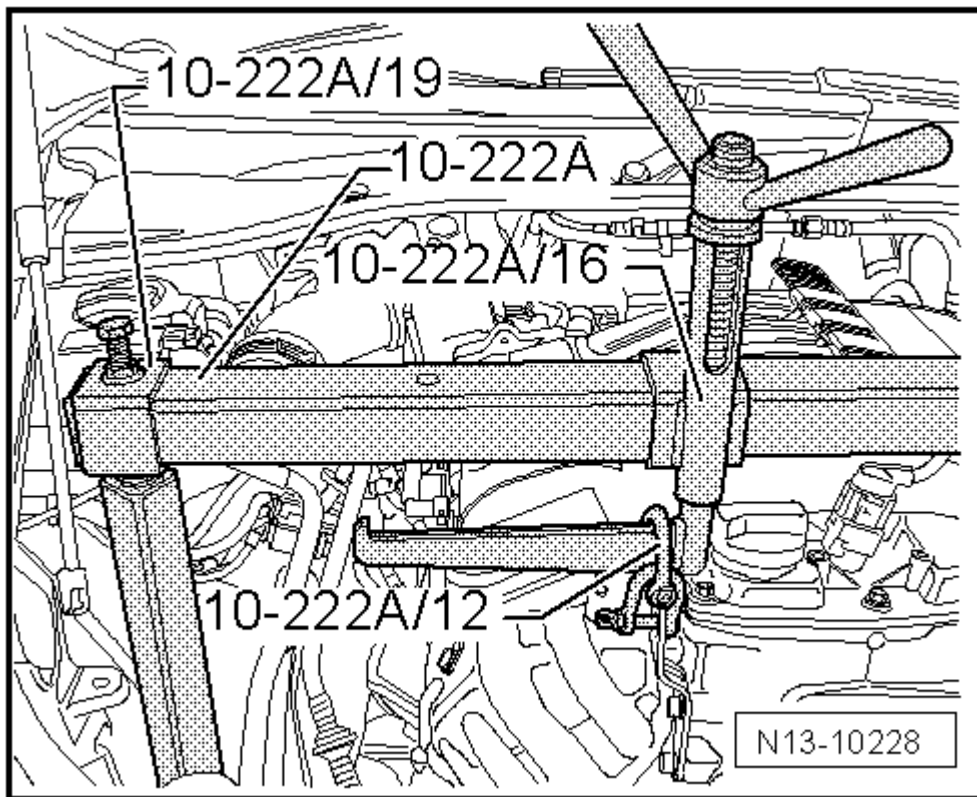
Engaging Engine With Two Shackles 10 - 222 A/12 At Adapter 10 - 222 A/16 And Pretensioning Engine Slightly
